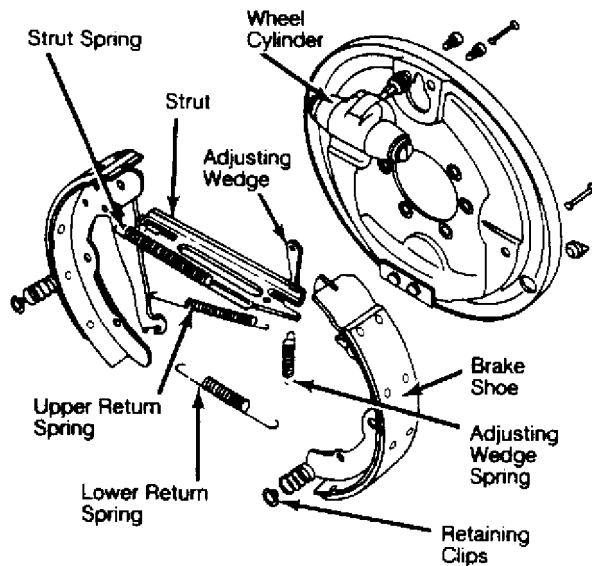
Exploded View of Rear Brake Assembly (All Others)
